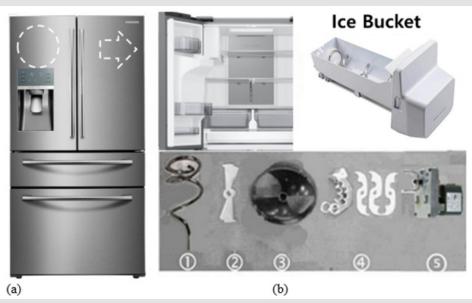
(a) Refrigerator and (b) Ice-maker system with helix support¹, blade dispenser², helix upper dispenser³, blade⁴, and auger motor⁵.
